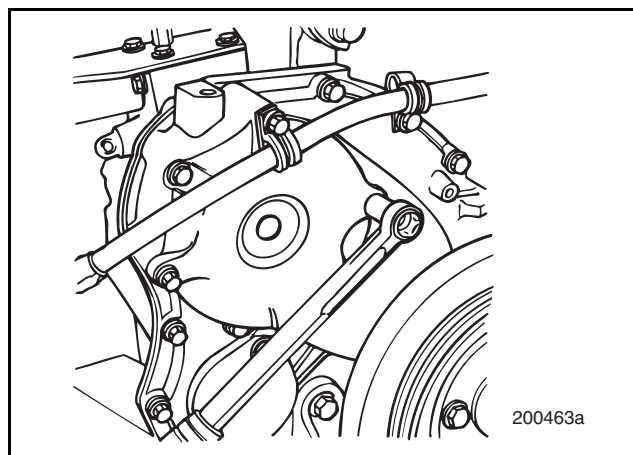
Installing and Torquing Access Cover Capscrews
